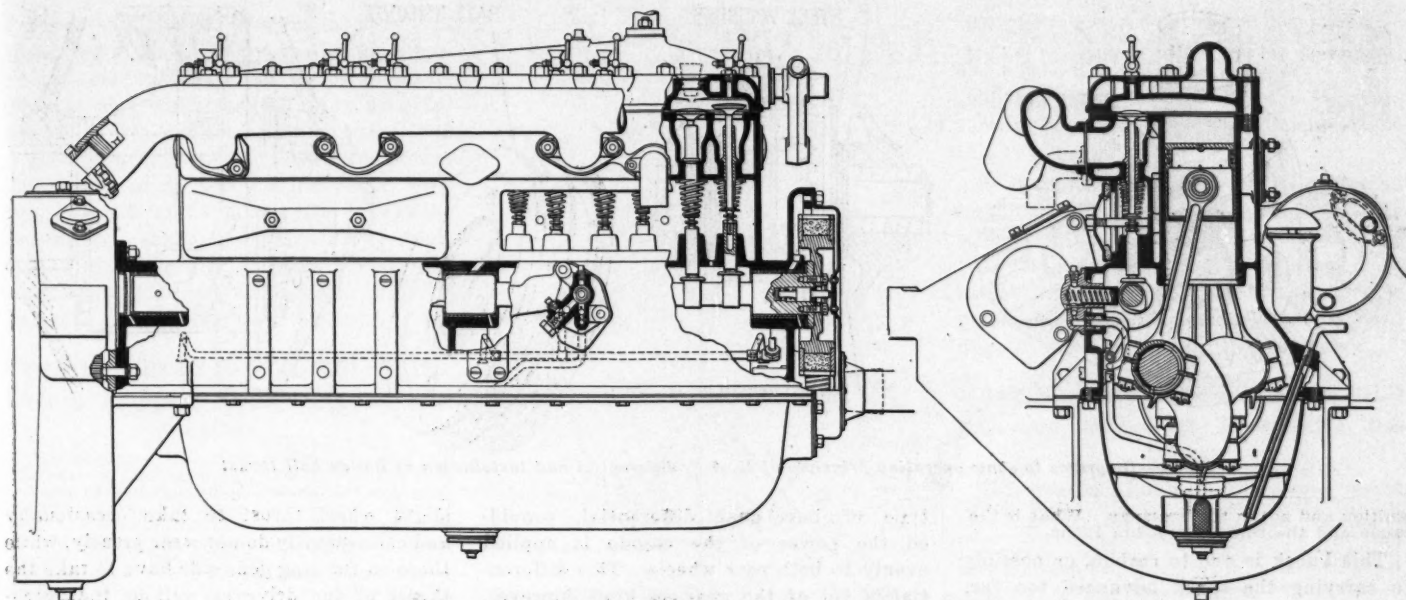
Sectional drawings of Continental engine published upon request of reader
